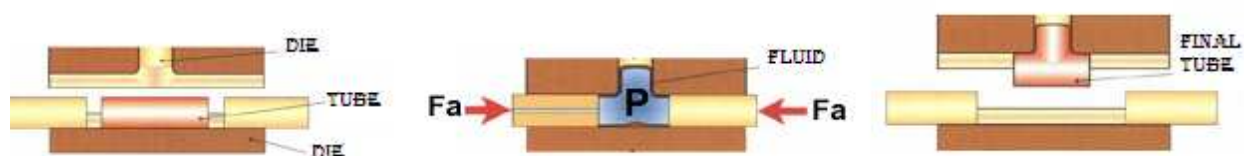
The principle of tube hydroforming: (a) original tube shape and (b) final tube shape (before unloading).
